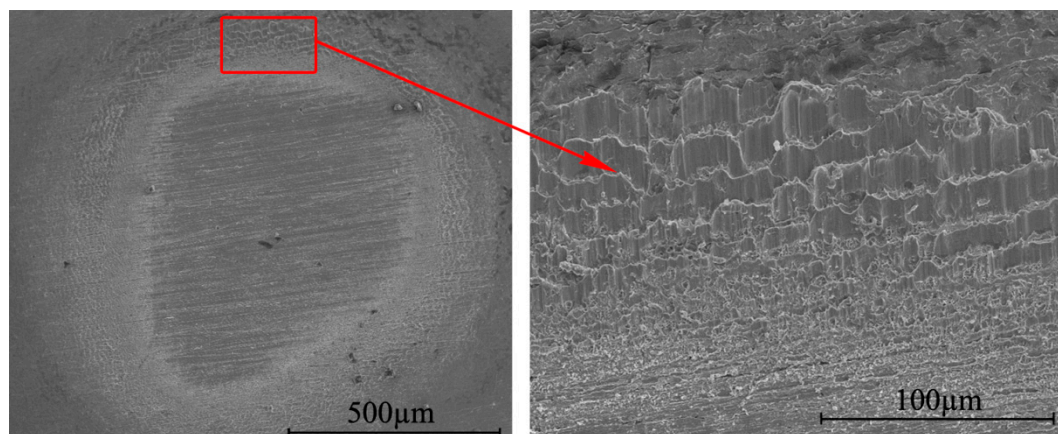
Fracture surface morphology on the base plate of the joint produced at 835 mJ pulse energy.
